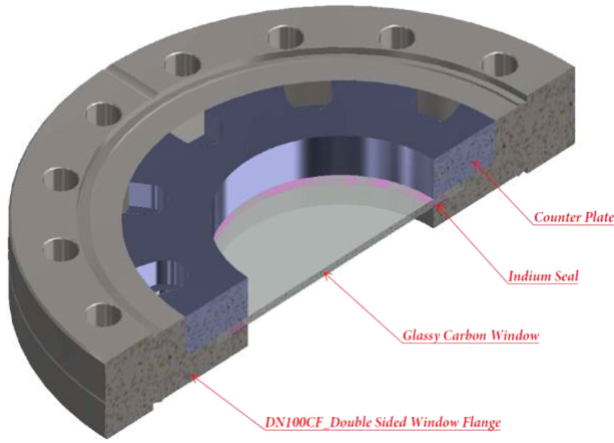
CAD drawing of one glassy carbon beam window tested at the HiRadMat facility [100].
